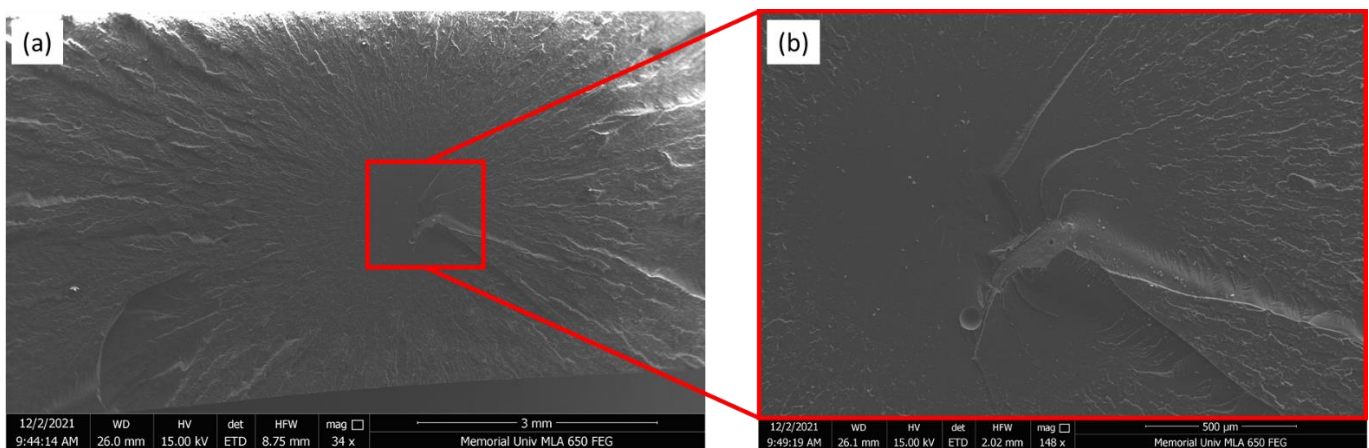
Specimen T2 fractured surface investigation using scan electron microscopy (a) lower magnification (b) higher magnification
